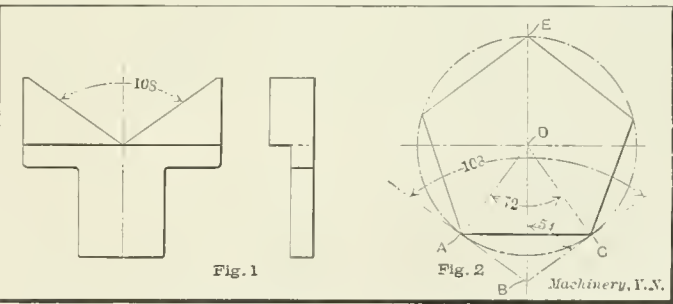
Gage used in Measuring Reamers having Five Cutting Edges
